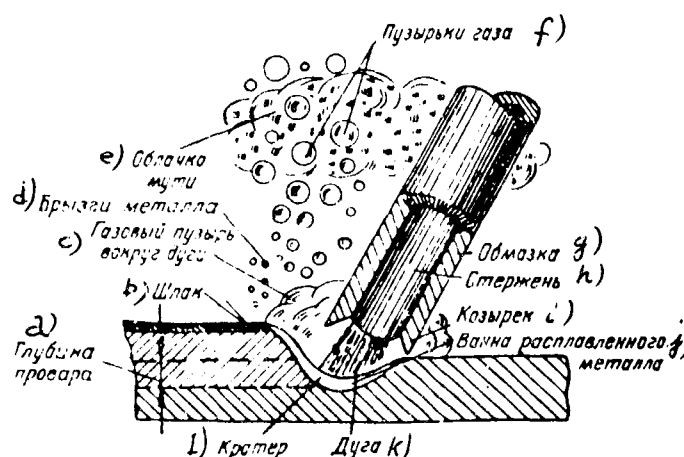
Diagram Showing Burning of Welding Arc Under Water.
